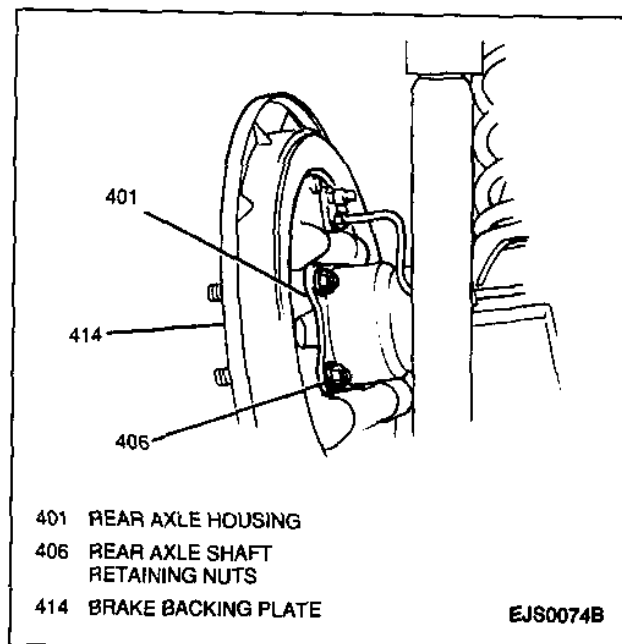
Removing Rear Axle Shaft Retaining Nuts
